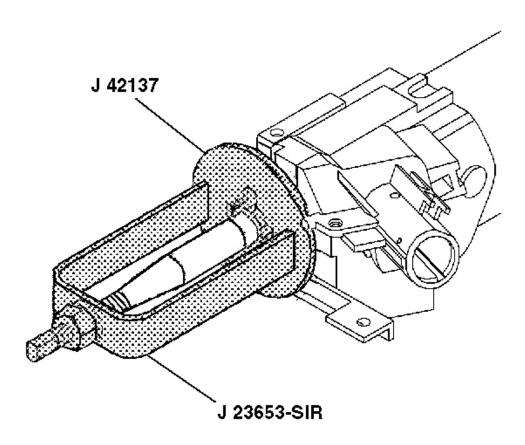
Depressing Lock Plate Using J 23653-SIR And J 42137 Courtesy of GENERAL MOTORS CORP.
